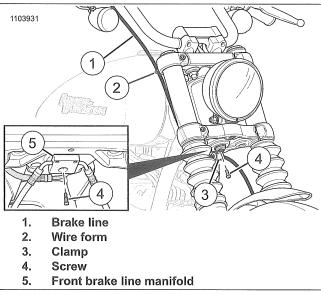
Front Brake Line: Single and Dual Front Caliper (Non ABS)
